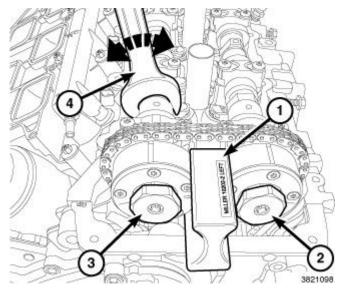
Camshaft Phaser Lock, Oil Control Valves & Wrench
